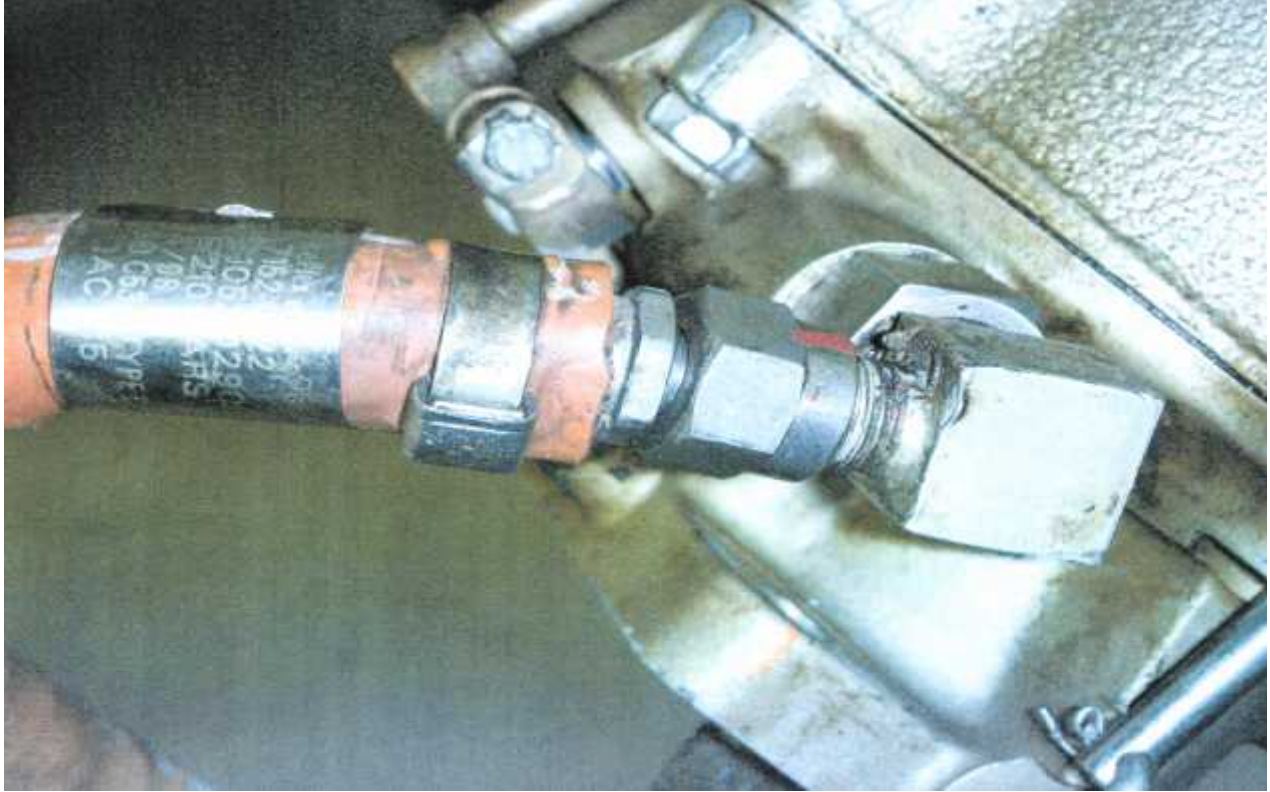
Photograph showing cross threaded end of the fuel hose
